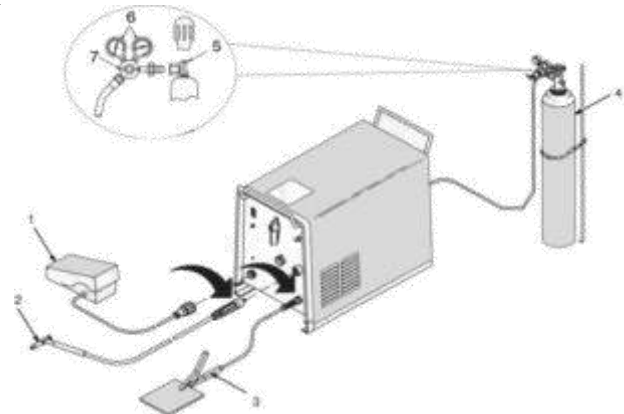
Schematic Diagram of TIG Welding System.
